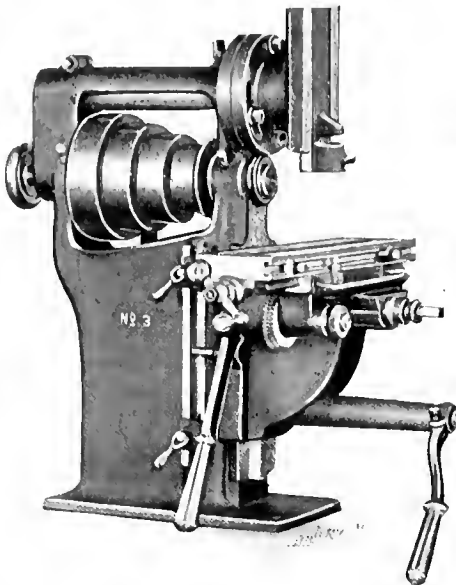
Stiffening Flange for Overhanging Arm, Clamped to Attachment Flange on Column
